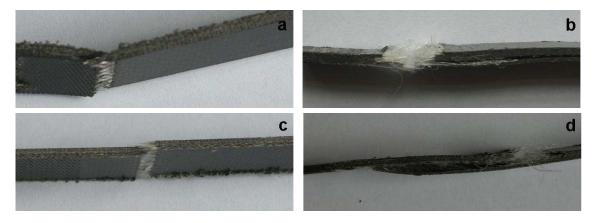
Photographs taken of the tensile test specimens: (a) GF-REC-REF, (b) SR-REC-REF, (c) GF-REC-FR18 and (d) SR-REC-FR18
